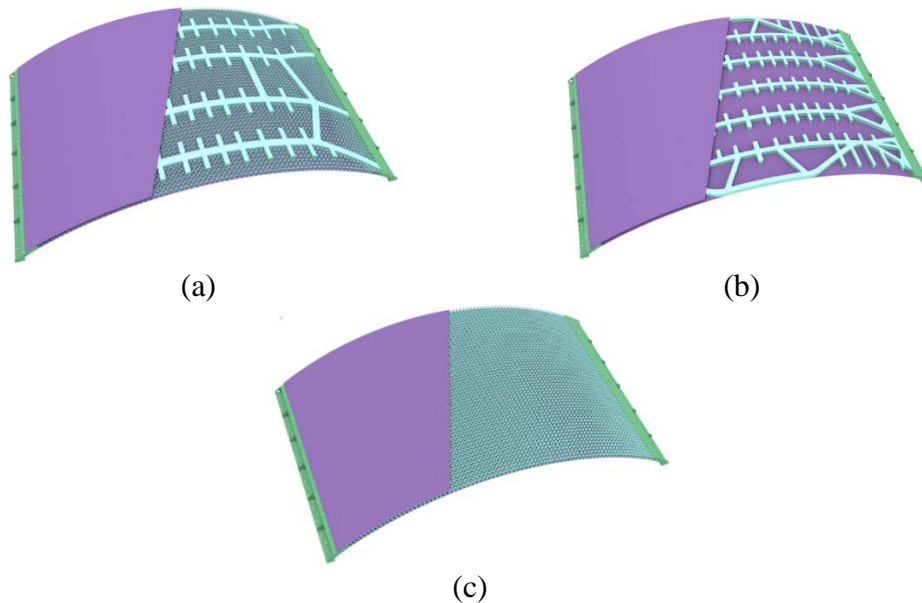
The reconstructed model of (a) panel structure with lattices and stiffeners; (b) stiffened panel structure; (c) lattice sandwich panel structure.
